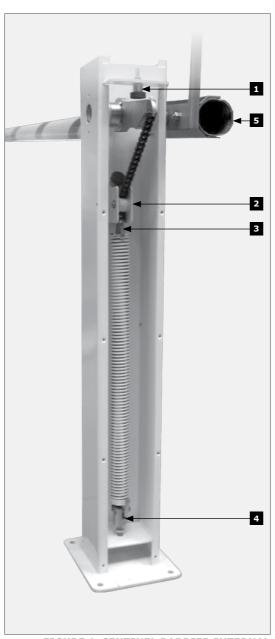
CENTINEL BARRIER INTERNAL SPRING ASSEMBLY
